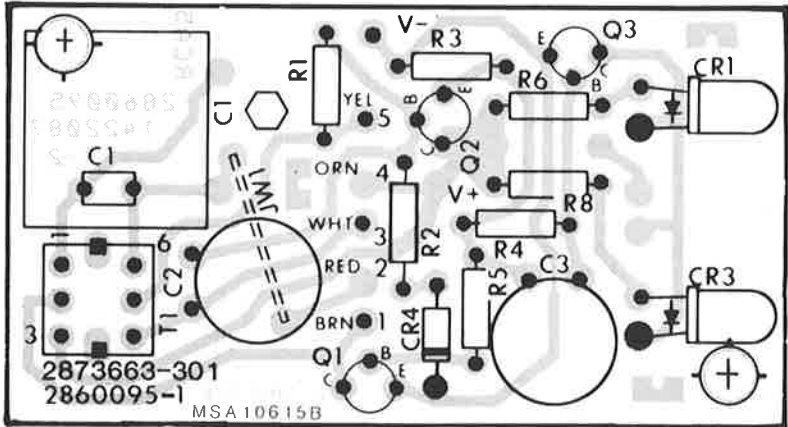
PW 1000 Circuit Board Assembly (SJT 300)
